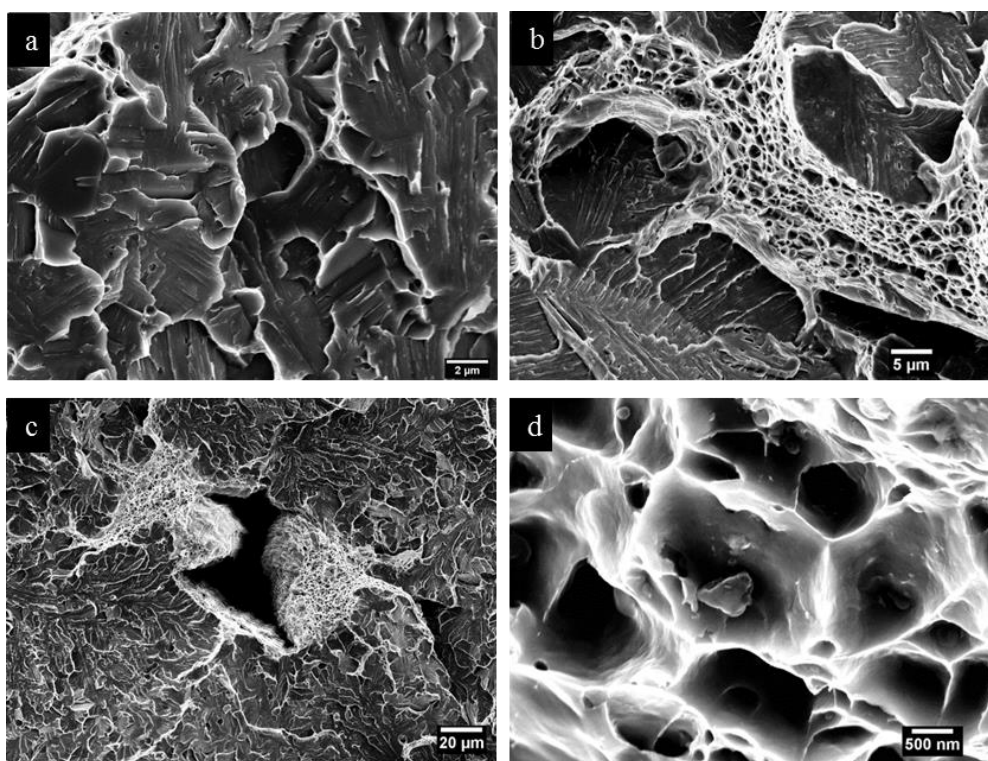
SEM fractograph images of APMT W30 as welded fracture surface showing a) brittle cleavage fractures in the TMAZ, b) higher magnification image showing the larger ductile fracture regions surrounding the brittle cleavage regions, c) fracture surface around a void and d) a higher magnification image of the ductile fracture region next to void area showing particles in the microvoid areas.
